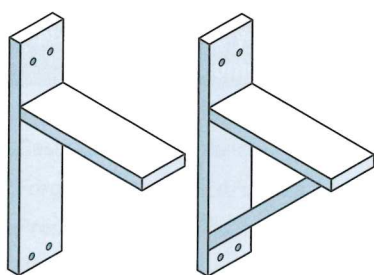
Isometric drawing of a redesigned shelf bracket
